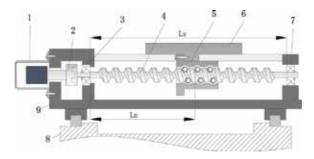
Typical structure of ball screw drive system. 1. Servomotor; 2. Coupling; 3. Fixed bearing; 4. Screw shaft; 5. Ball screw nut; 6. Work table; 7. Support bearing; 8. Machine bed; 9. Base.
